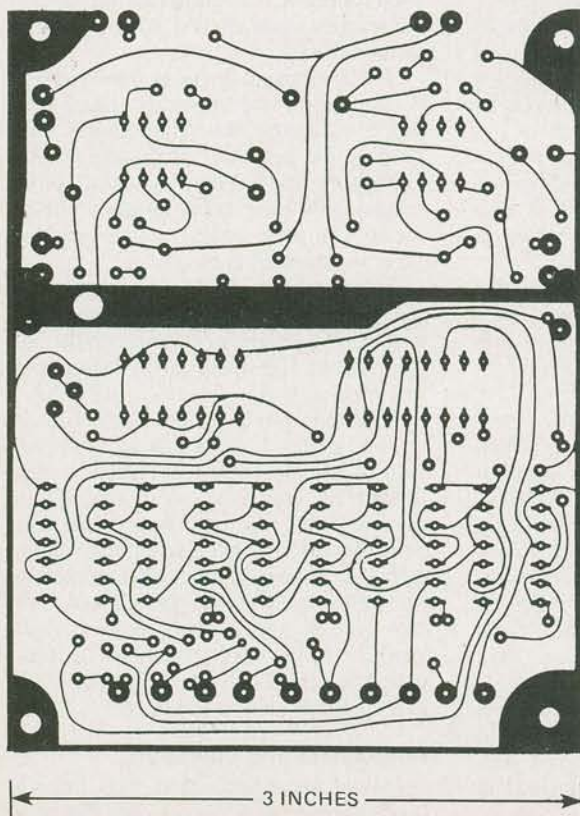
WHILE TUNER CAN BE HAND-WIRED, a printed-circuit board (left) will make for neater construction.
